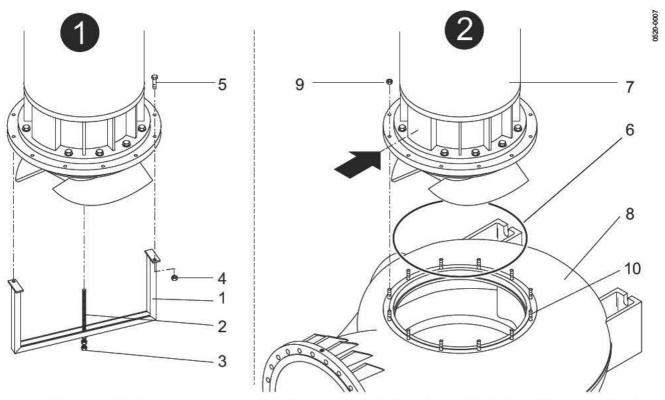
Removal of the transport devices in motors with an impeller installed and a volute to be fitted at the construction stage
